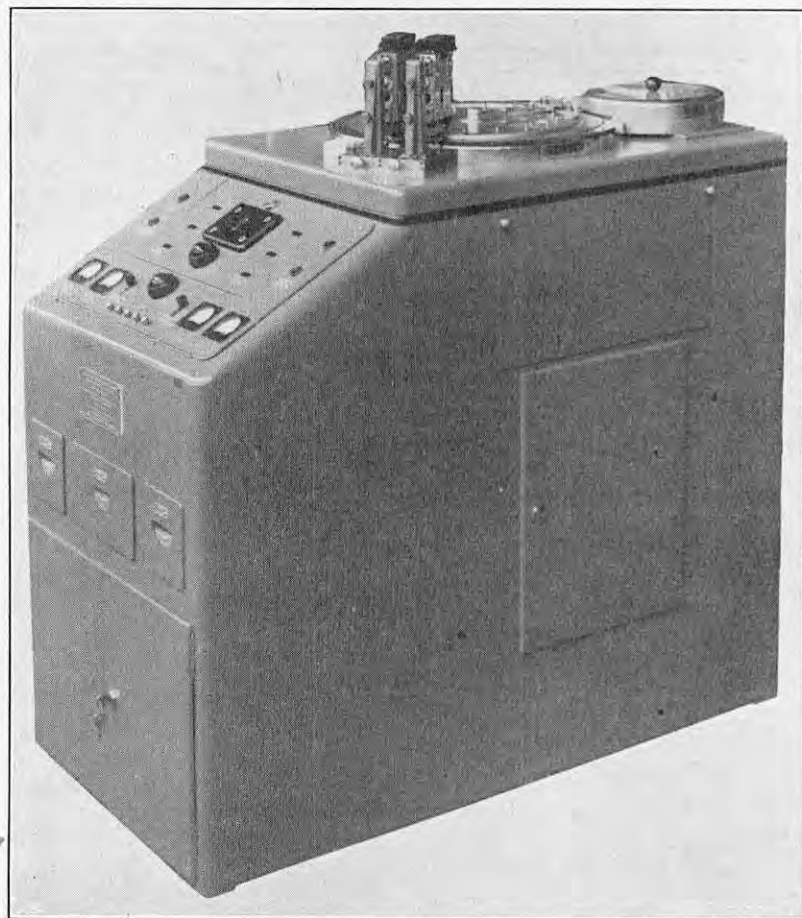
HIGH-SPEED MACHINE FOR SORTING BY SIZE.
